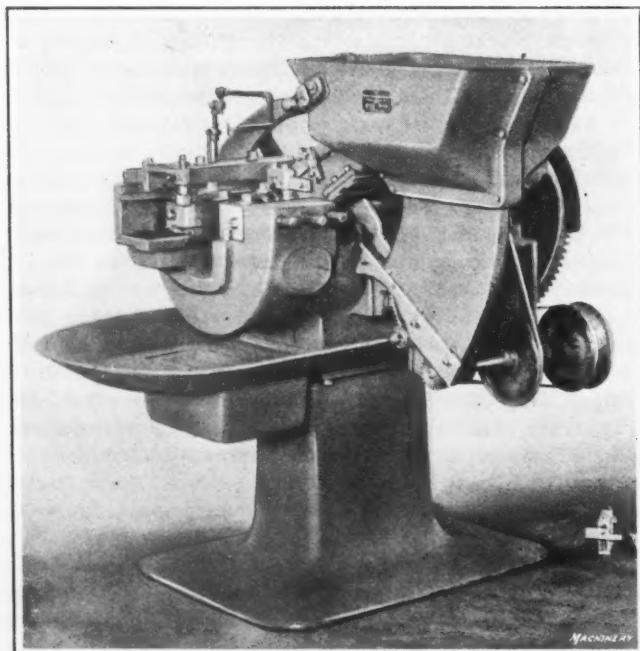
Thread-rolling Machine provided with Automatic Feeding Mechanism
